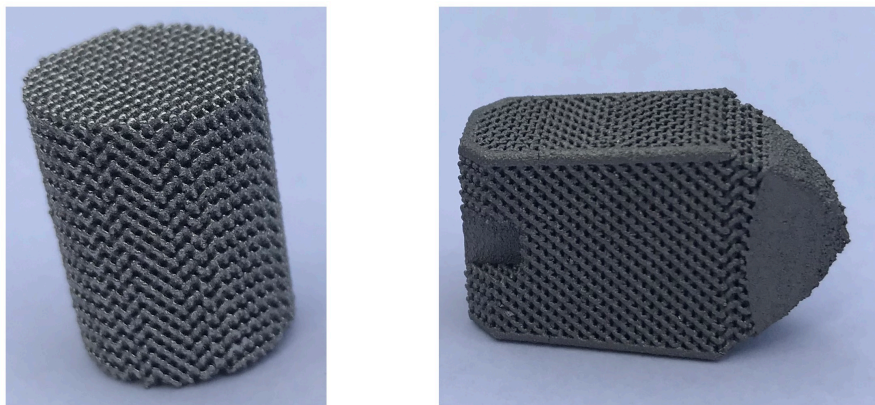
3D printed samples used for mechanical testing. Cylindrical sample (left) and spinal cage (right).
